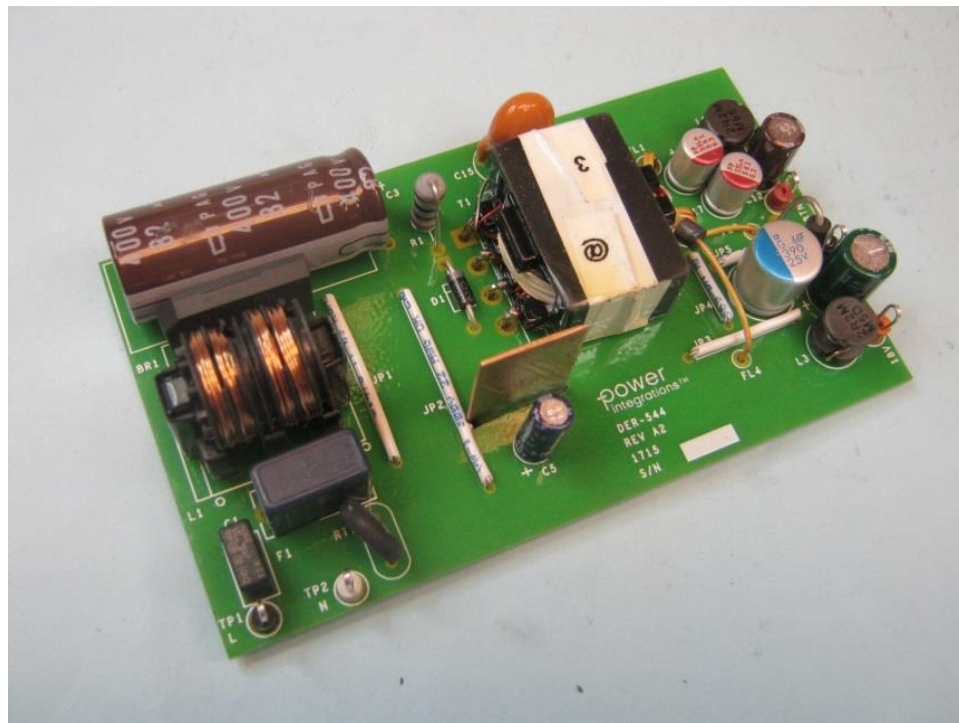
Populated Circuit Board Photograph, with Heat Sink.
